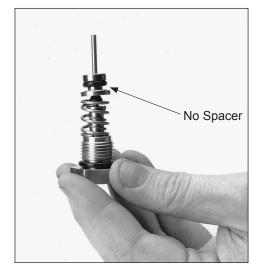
Stack the Return Spring, Stem Guide, Orifice Spring, Plug and Stem, Orifice, Orifice O-Ring, and Back-up Washer on the Bottom Cap
